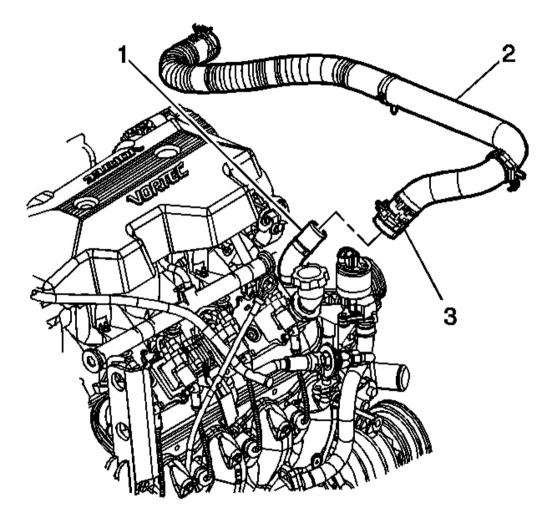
Radiator Hose & Engine (Inlet) Courtesy of GENERAL MOTORS CORP.
